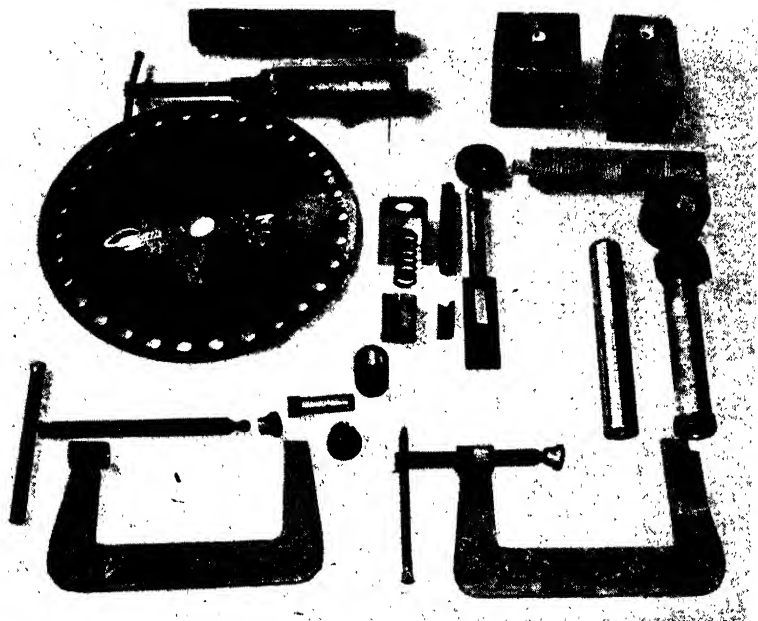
This is a group of "stock" items for the jig and fixture department. They will lend themselves to many of the jig-building problems and may often be salvaged from one fixture and used again. Note that the perforated "stop" disk has been cut from one fixture and ground for re-use later. (Courtesy of R. G. LeTourneau, Inc.)
